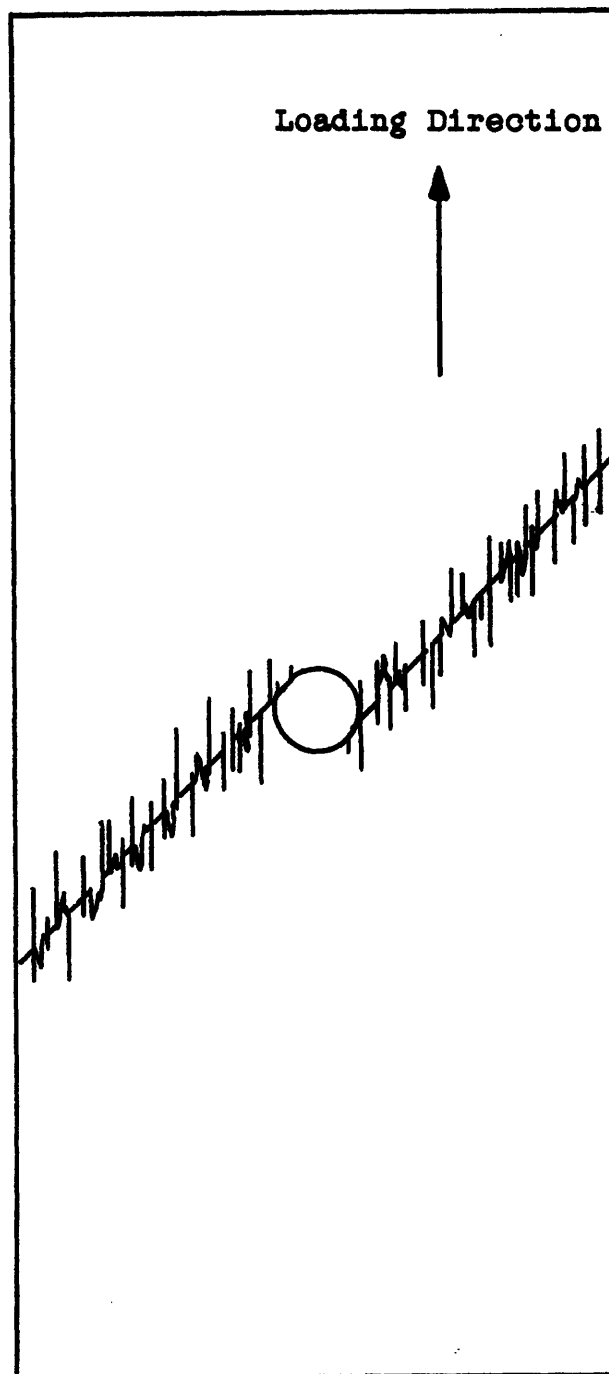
Sketch of Failure of Specimen with 12.7 mm Drilled Hole
